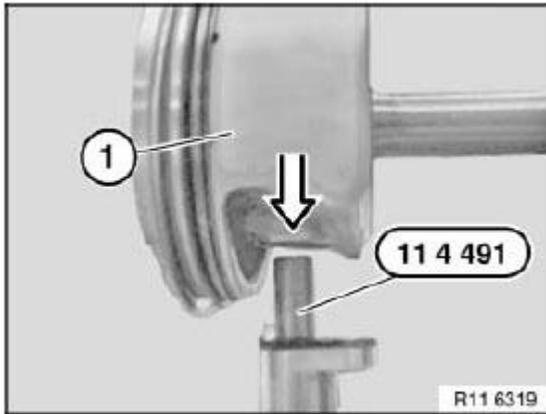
Identifying Piston With Special Tool (11 4 491)
